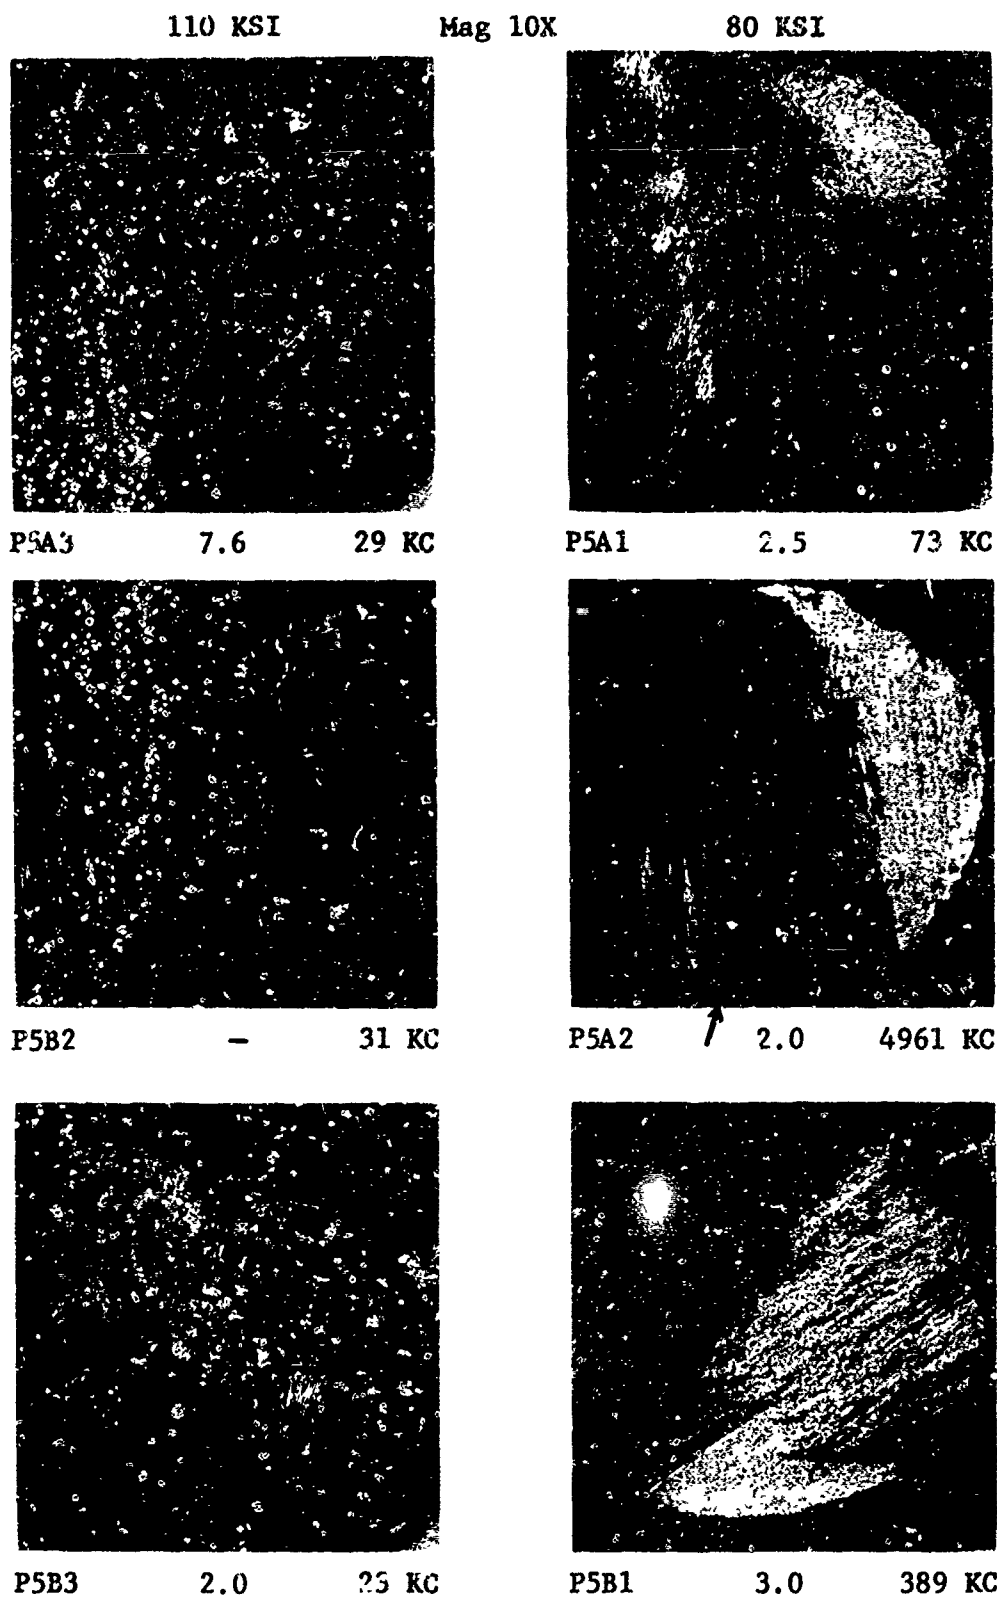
Fracture Surfaces of Failed Fatigue Specimens Series P5-Double-Bond/Two-Axis Diffusion Bonded with ASTM Grain Size No. 10
